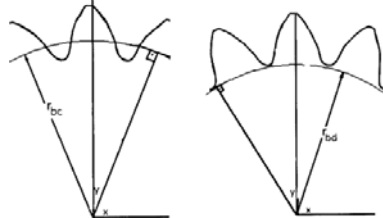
Different tooth profiles on Coast and drive sides of asymmetric involute tooth.
